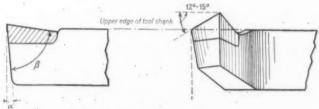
Sketch of a Tungsten Carbide Tool Good for Heavy Work.
